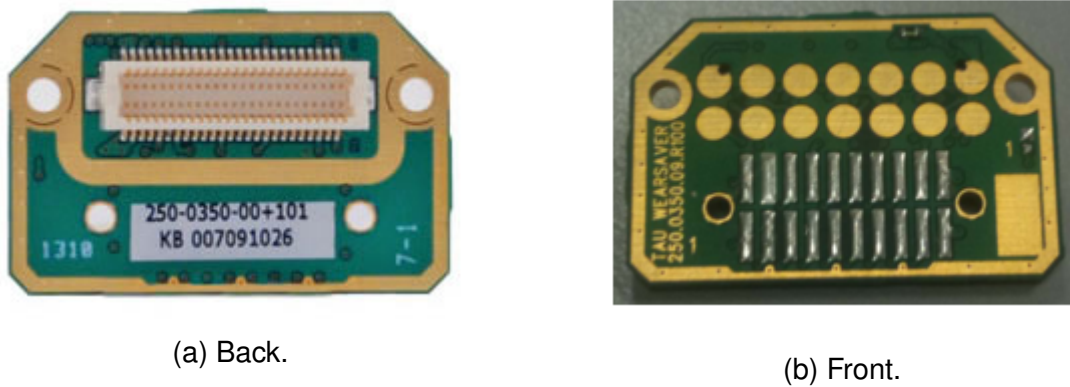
FLIR Tau PCB Wearsaver with Solder Pads.
